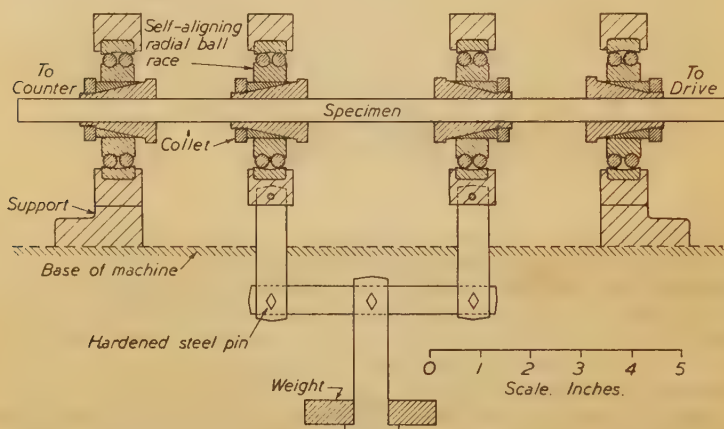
The Fatigue Testing Machine; the specimen, of uniform diameter, stressed uniformly between the two loading points.
